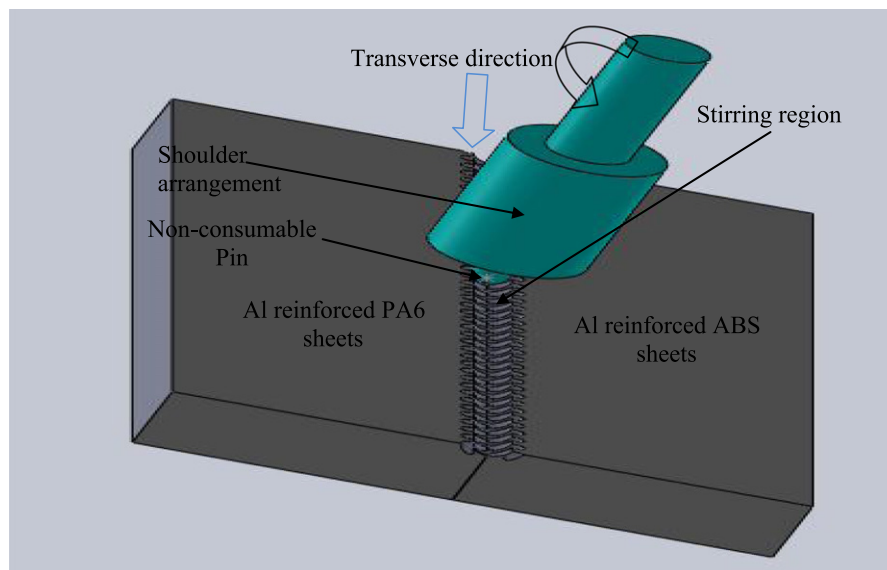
Friction stir welding process for dissimilar thermoplastic joining. Reproduced from Kumar, R., Singh, R., Ahuja, I.P.S., 2019. Friction stir welding of ABS-15Al sheets by introducing compatible semi-consumable shoulder-less pin of PA6-50Al. Measurement 131, 461–472.
